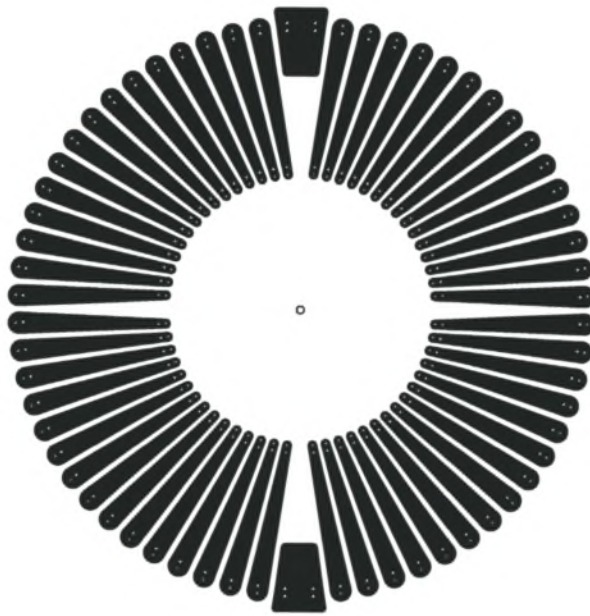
PCB artwork used for the winding configuration of MPC inductors.
